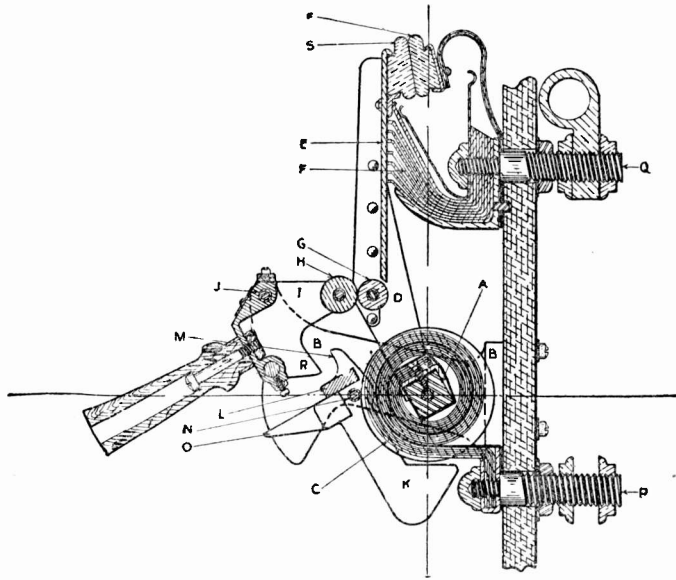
Half Section of Over-Load Type of Circuit Breaker—Closed
